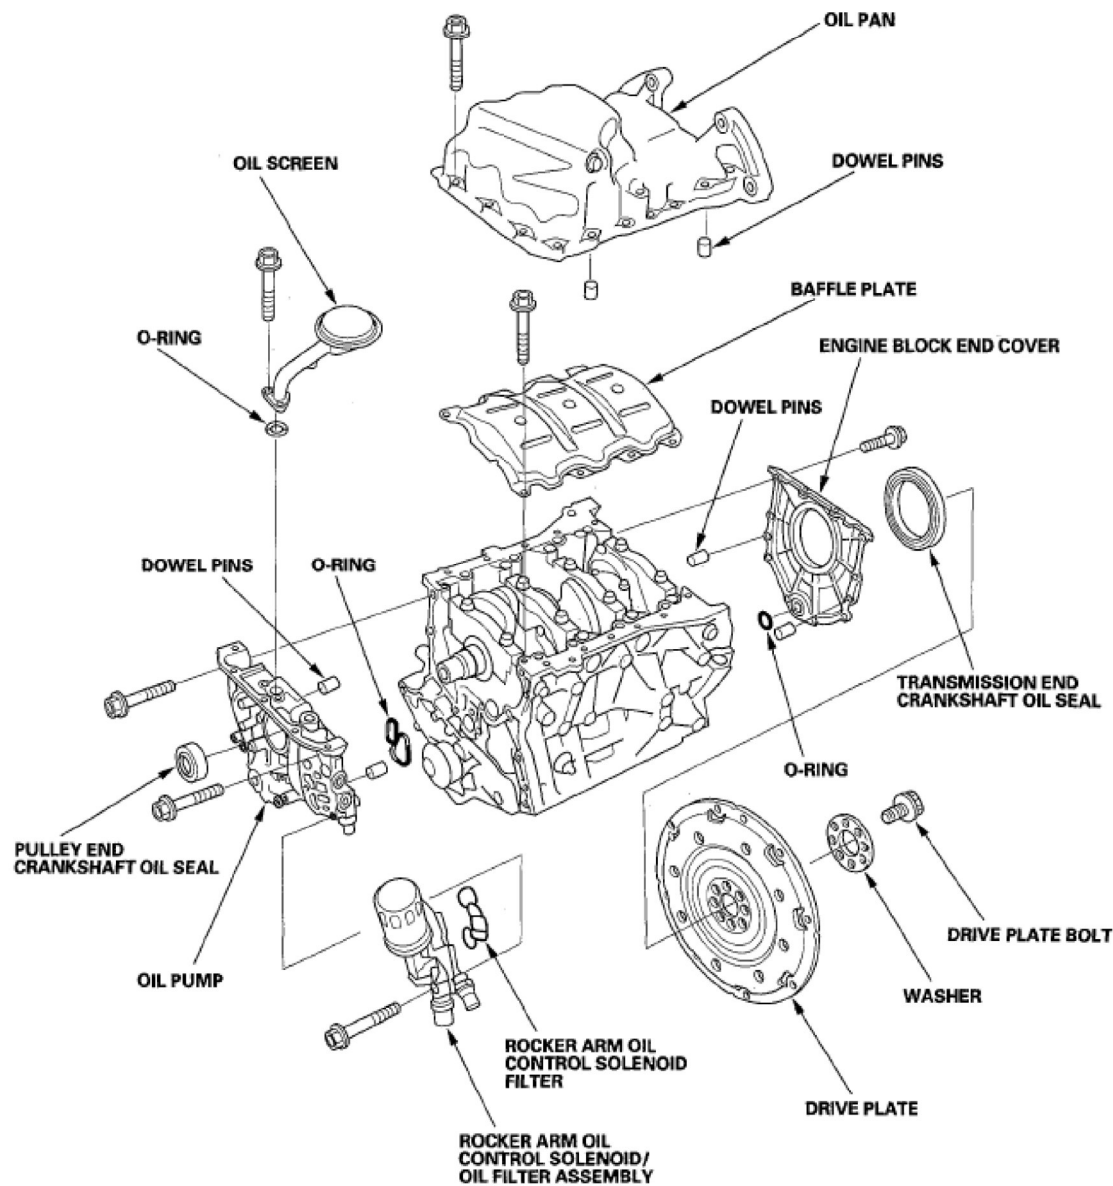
Identifying Engine Block Component Location - J35A6 Engine
